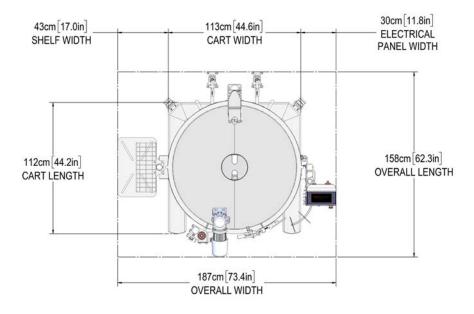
1,000 L S.U.M. dimensions (top view).
